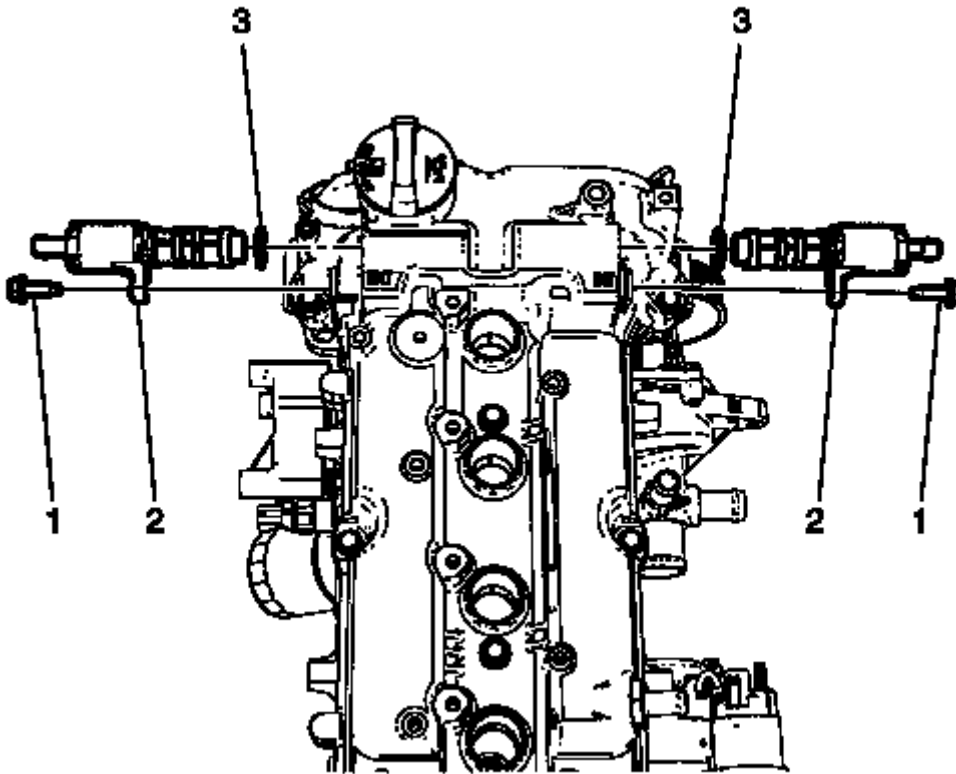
Camshaft Position Actuator Solenoid Valve Bolts
